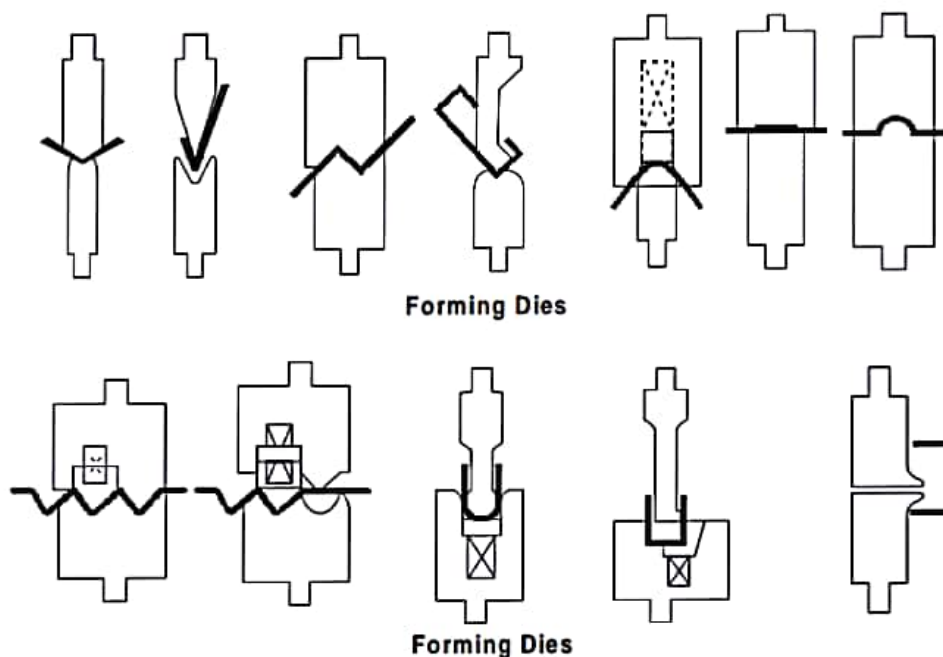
Kinds of sheet metal bends using press brake dies
